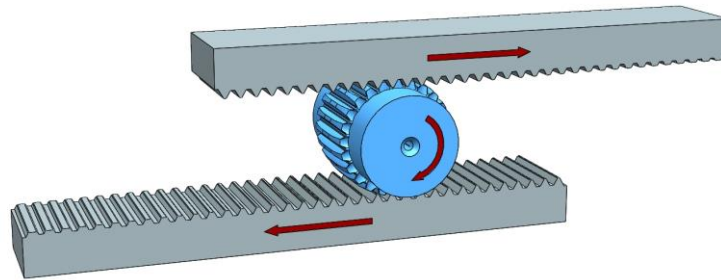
RotoFlow / Rack Shaped Rolling Tools
